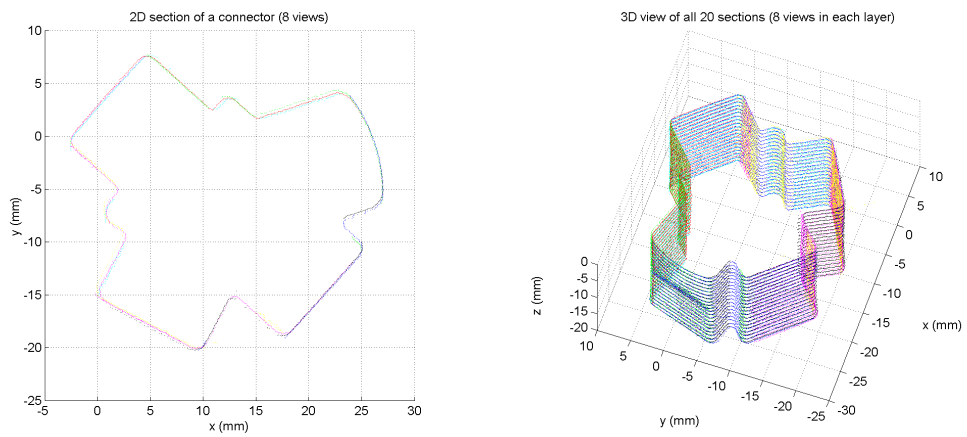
Reconstructed cable connector section in layer 0; 3D view of all sections.
